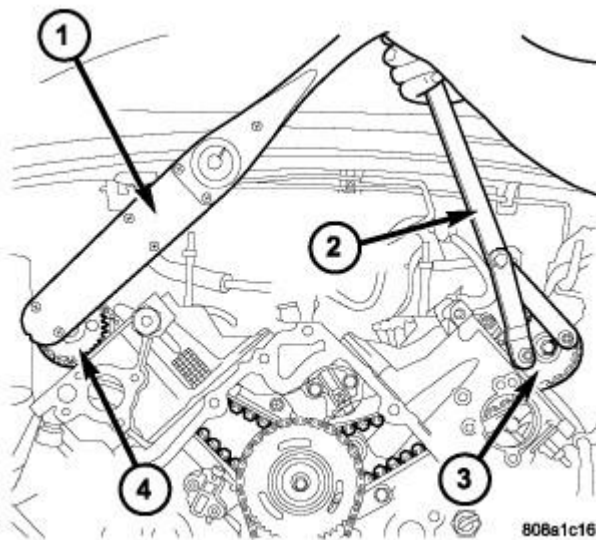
Tightening Right Side Camshaft Sprocket Bolt
